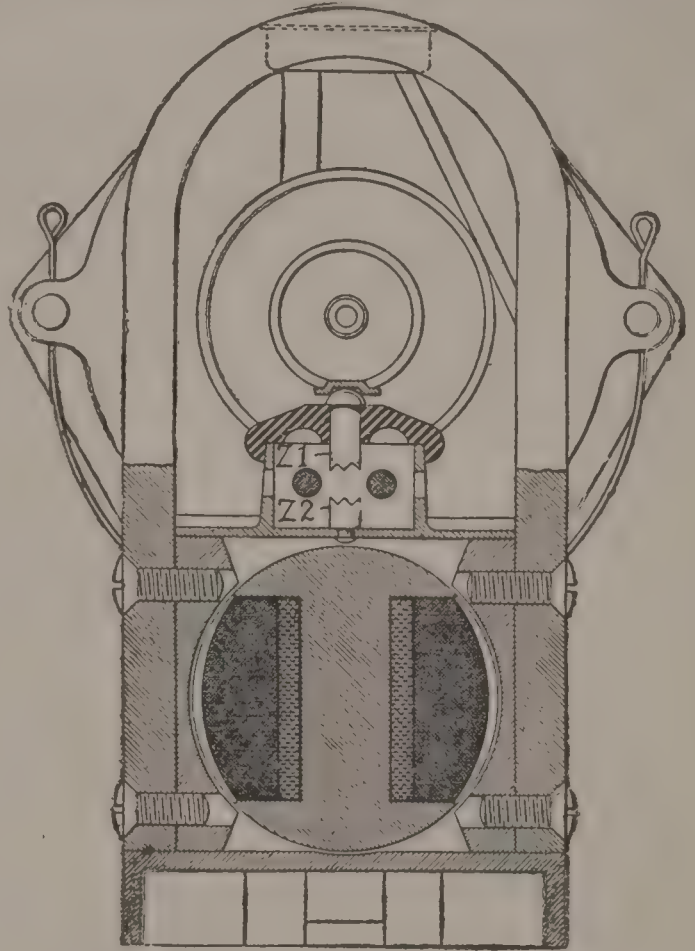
Cross-section of typical high-tension magneto perpendicular to the armature shaft
